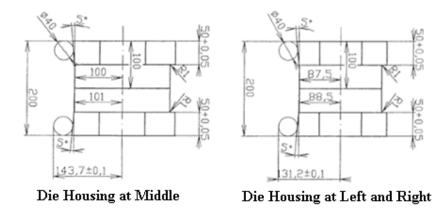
Front View of the Circular Die Housings of the Die Holder [46]
